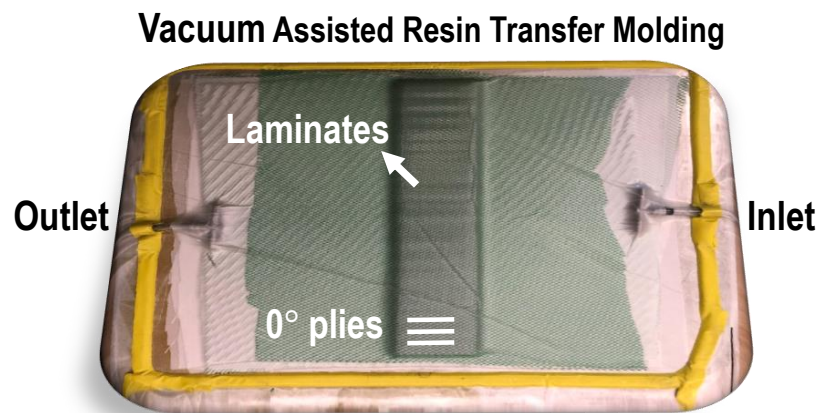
Vacuum Assisted Resin Transfer Molding (VARTM) technique for the manufacturing of the laminates composed of pure epoxy and unidirectional dry carbon fabrics.
